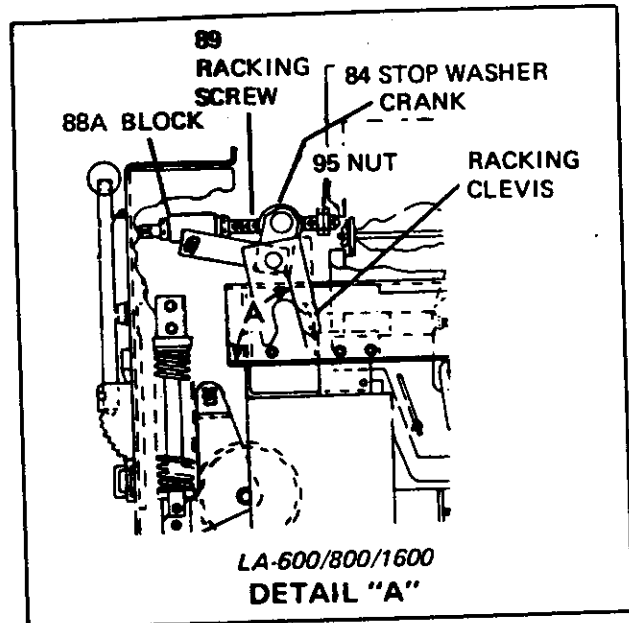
Detail of Typical Racking Mechanism and Drawout Interlock
